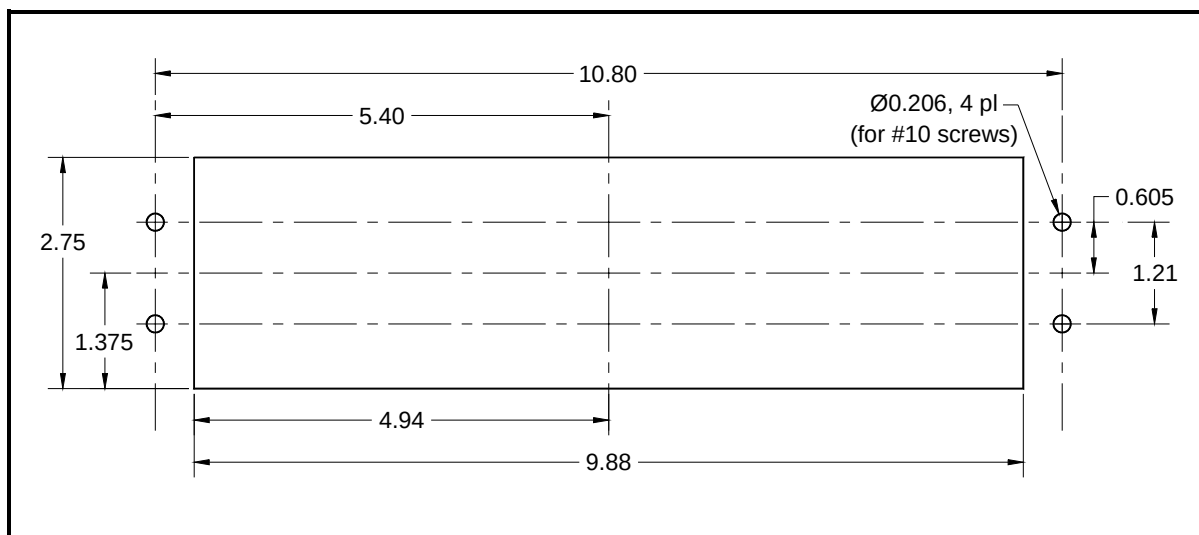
Hygro-M1 Panel Mounting Dimensions
